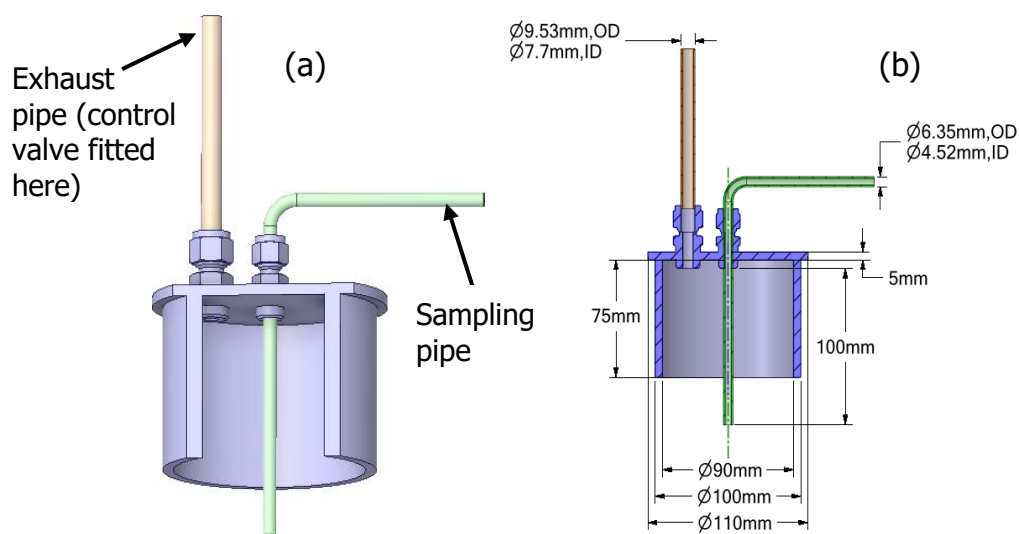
The gasifier cap showing exhaust and gas sampling pipes (a) with detailed dimensions (b).
